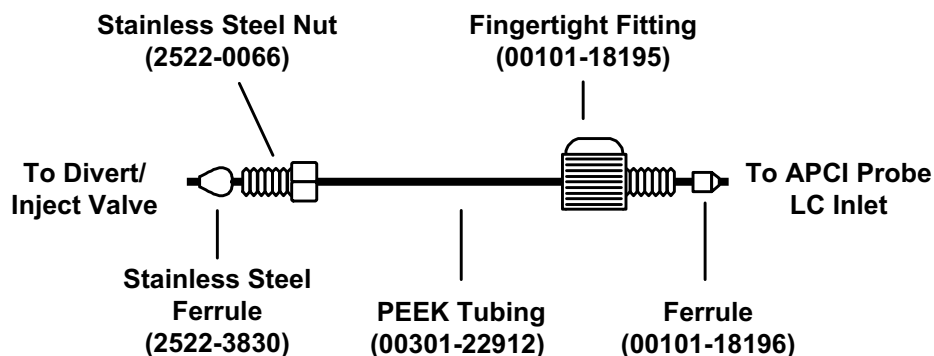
Sample transfer line, installed between the divert/inject valve and the APCI probe
